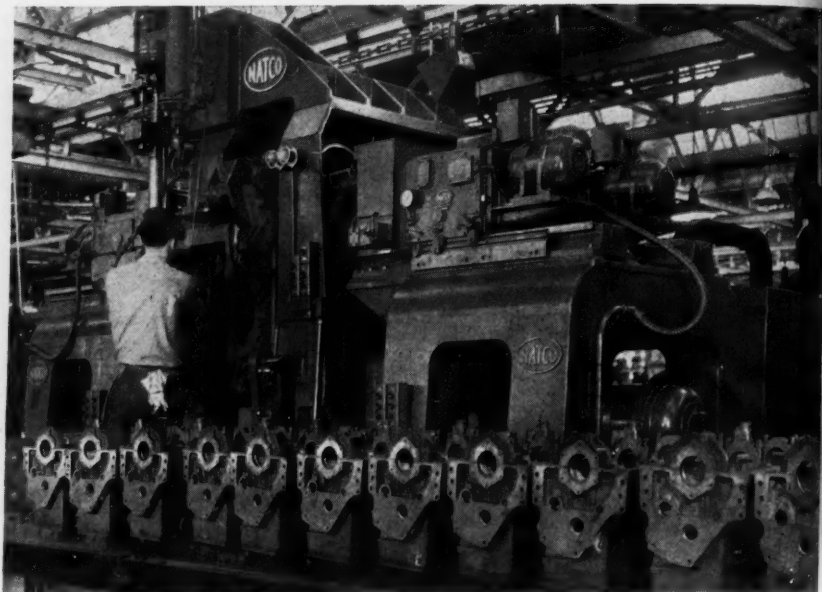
Natco "drum-type" drilling machine. At the time the picture was taken, a few blocks had "banked" up ahead of the operator.
